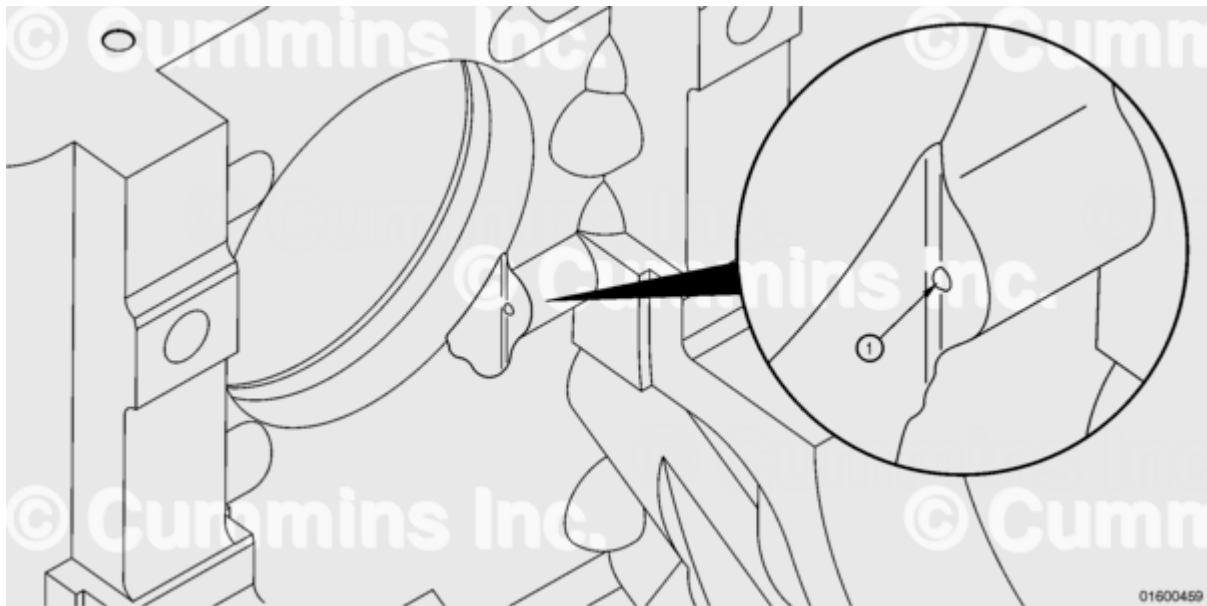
Sidewall Machining (1) Capscrew hole exposed by sidewall machining; use a silicone sealant on the hand hole cover capscrews during final assembly to reduce the possibility of an oil leak.
